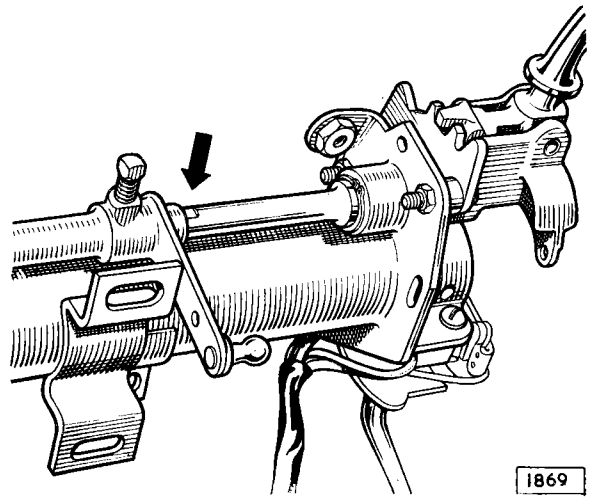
Align the flat on the end of the upper control shaft with the securing screw on the control lever.
